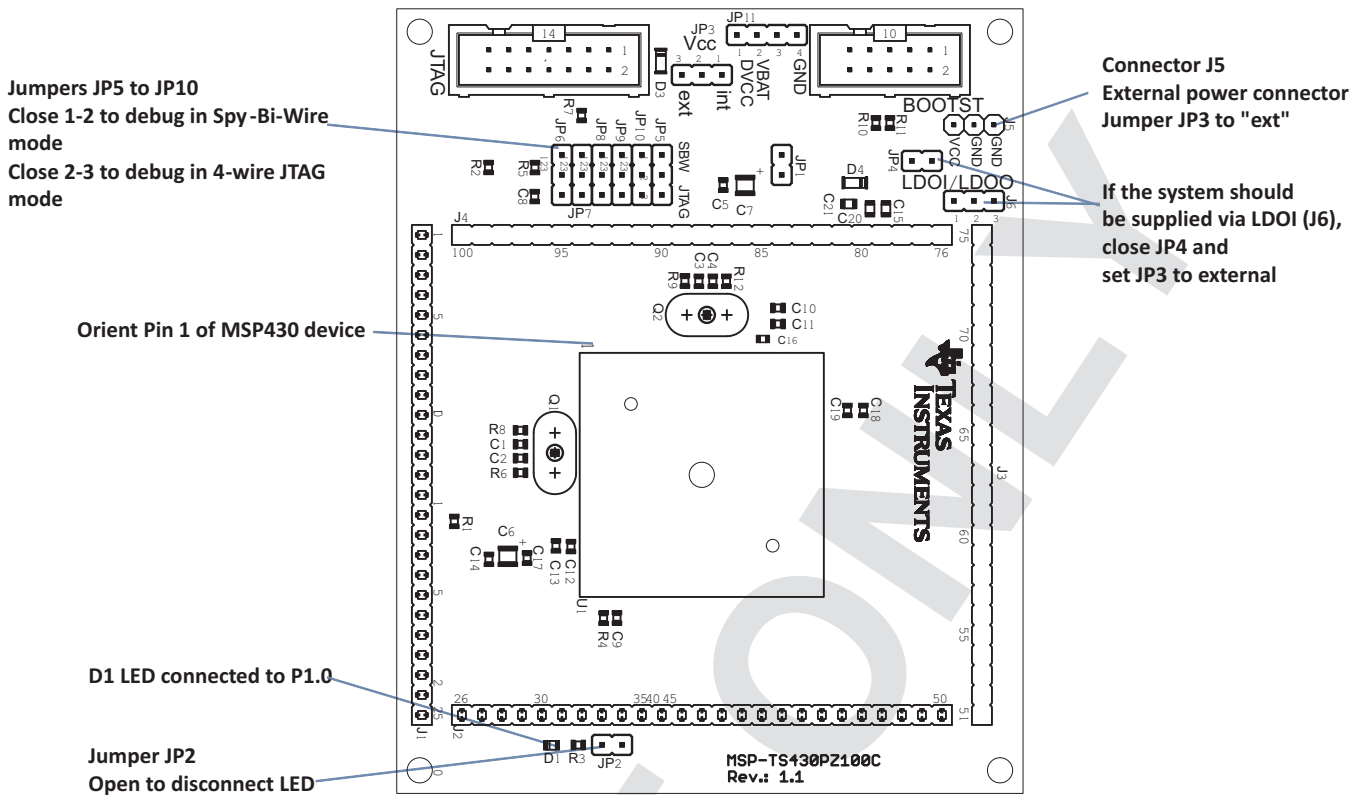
MSP-TS430PZ100C Target Socket Module, PCB
